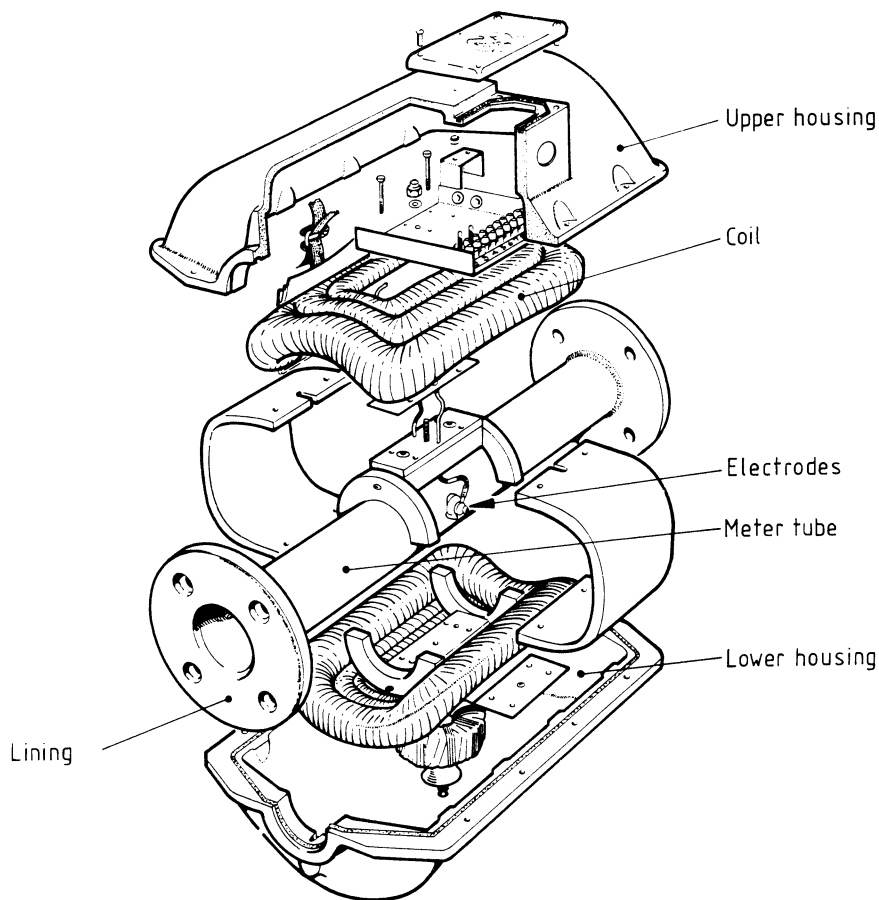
Exploded view of the primary device of an electromagnetic flowmeter
